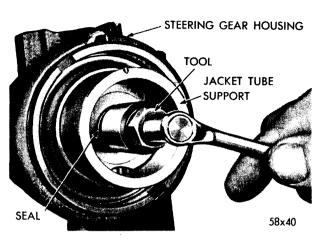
Removing Worm Shaft Upper Oil Seal with Tool C-3638
